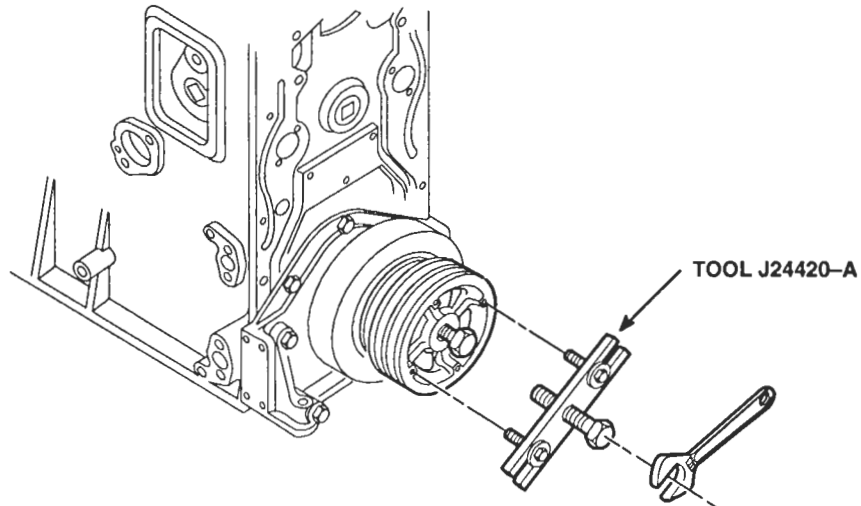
Removing Pulley with Tapped Holes from Crankshaft
